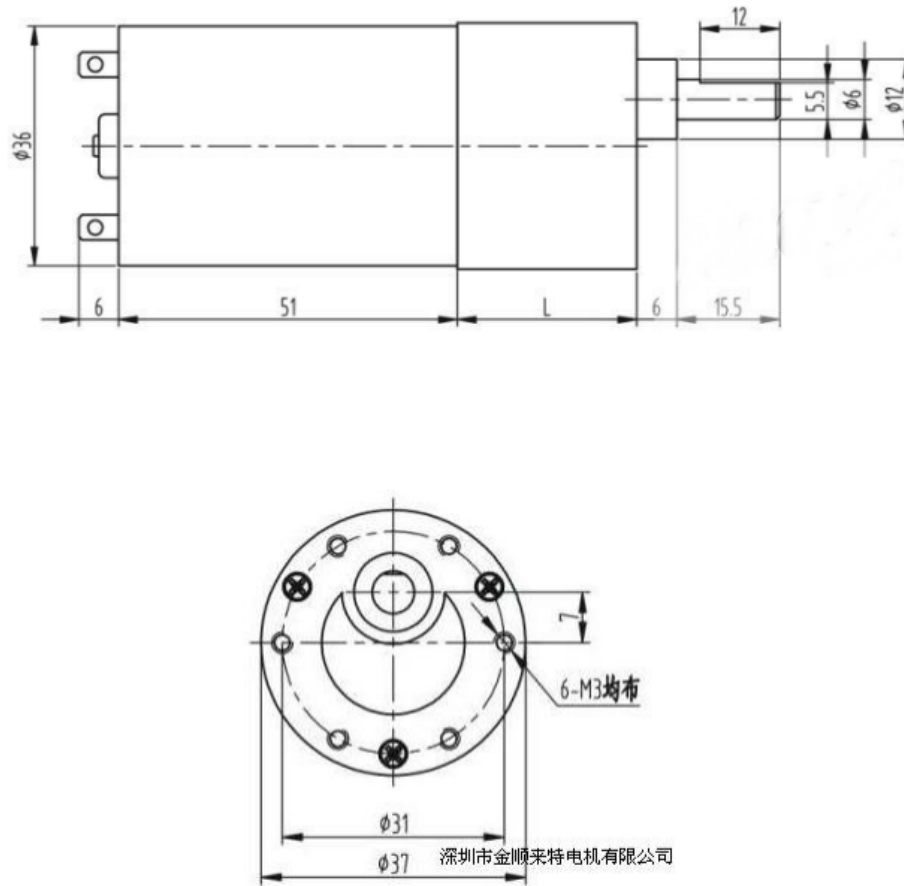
Dimensions of the JGB37-545 gear motor [2]
